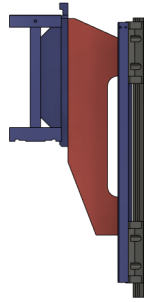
Front view onto the driving unit with the red girder hangings.
